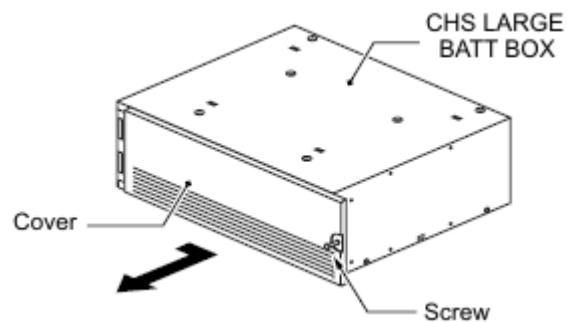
Removing CHS LARGE BATT BOX Cover
